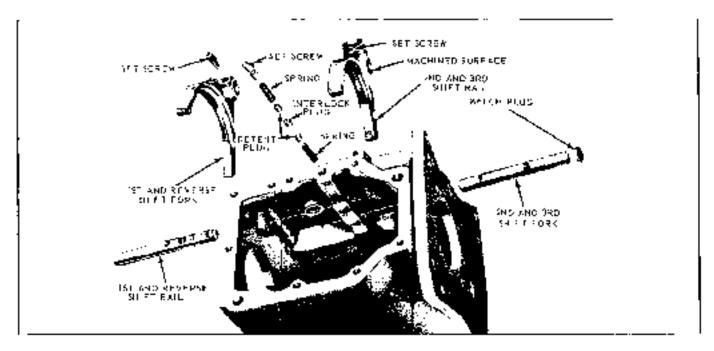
A-7 Shift Rails, Forks, Detent Plugs and Detent Springs.
